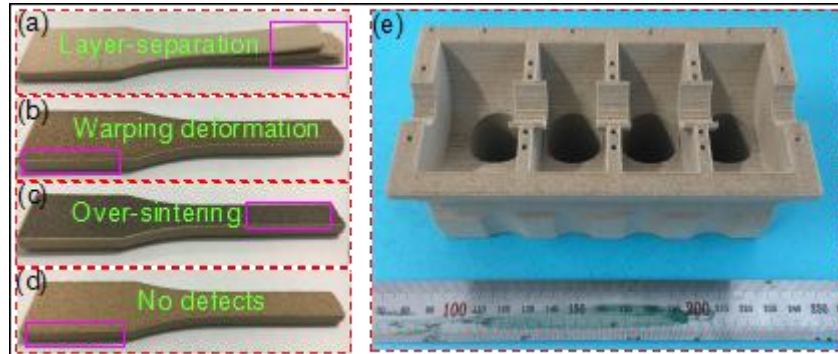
WSPC parts: (a) No. 4 part; (b) No. 7 part; (c) No. 14 part; (d) No. 4 optimized part; and (e) Engine box
